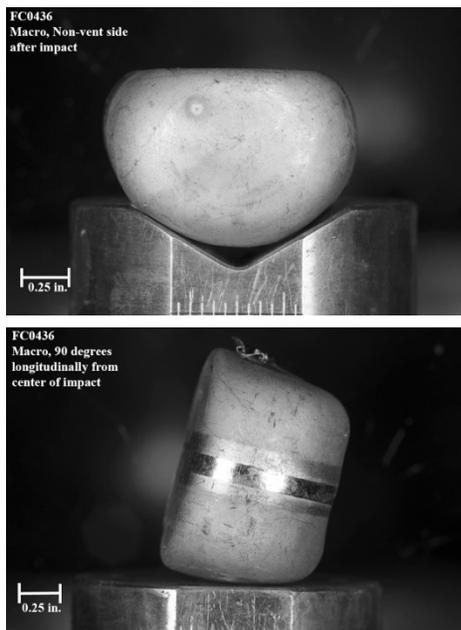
Typical impacted clad showing deformation without fracture of iridium clad
